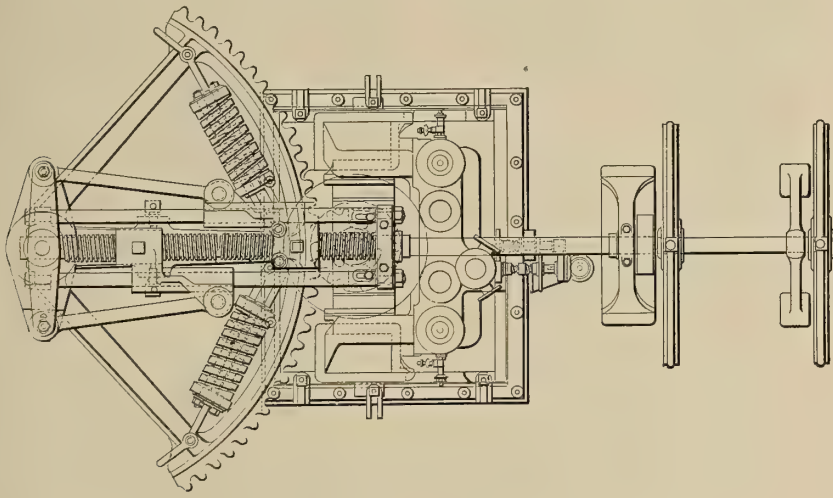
PLAN OF WILSON & PIRRIE'S STEERING GEAR.
